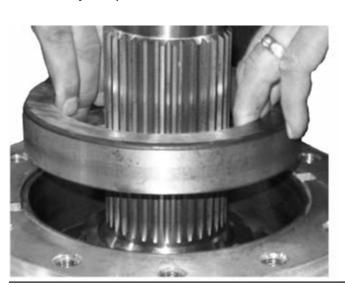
Install the Chilled Forward Thrust Bearing Cup, Raise the Shaft to Ensure End Play
